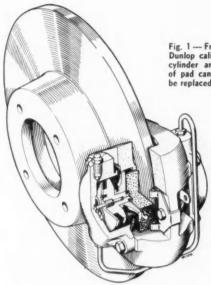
Friction pad retractor mechanism of the Dunlop caliper disc brake is enclosed within the cylinder and piston assembly. Wear condition of pad can be seen directly and worn pads can be replaced without dismantling brake.
